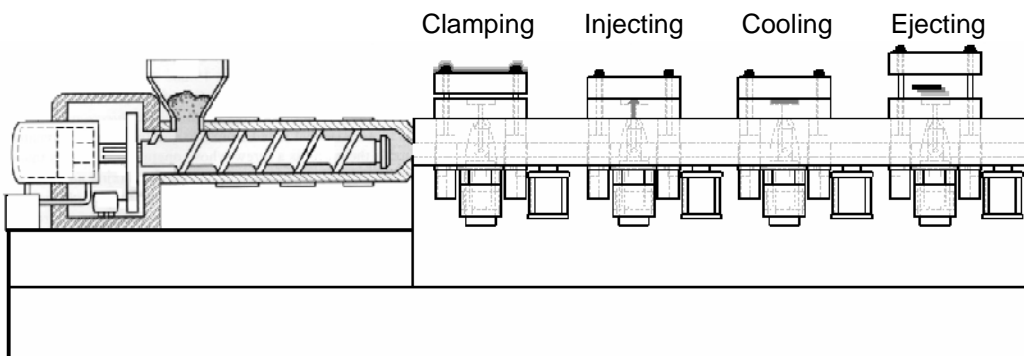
Side View of Platenless Extrusion-Injection Molding Machine Line
